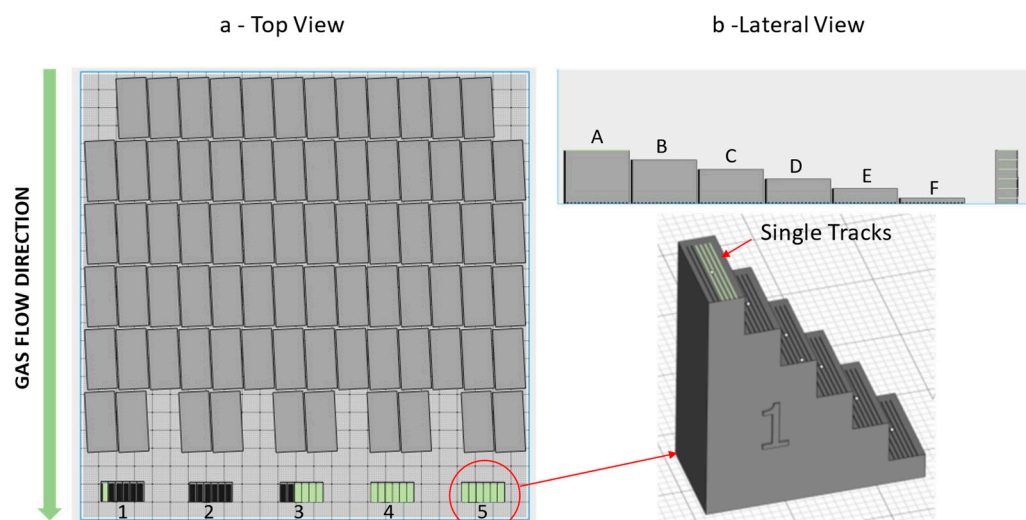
Job layout and specimen design: (a) Top view, (b) Lateral view. The dimensions of each grid square are 10 mm × 10 mm.
